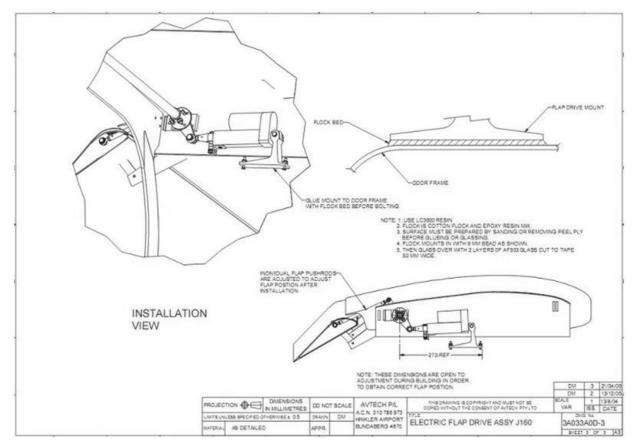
Flap Controls - Sheet 3 (Aluminium Motor Mount) (J120, J160, J170)
